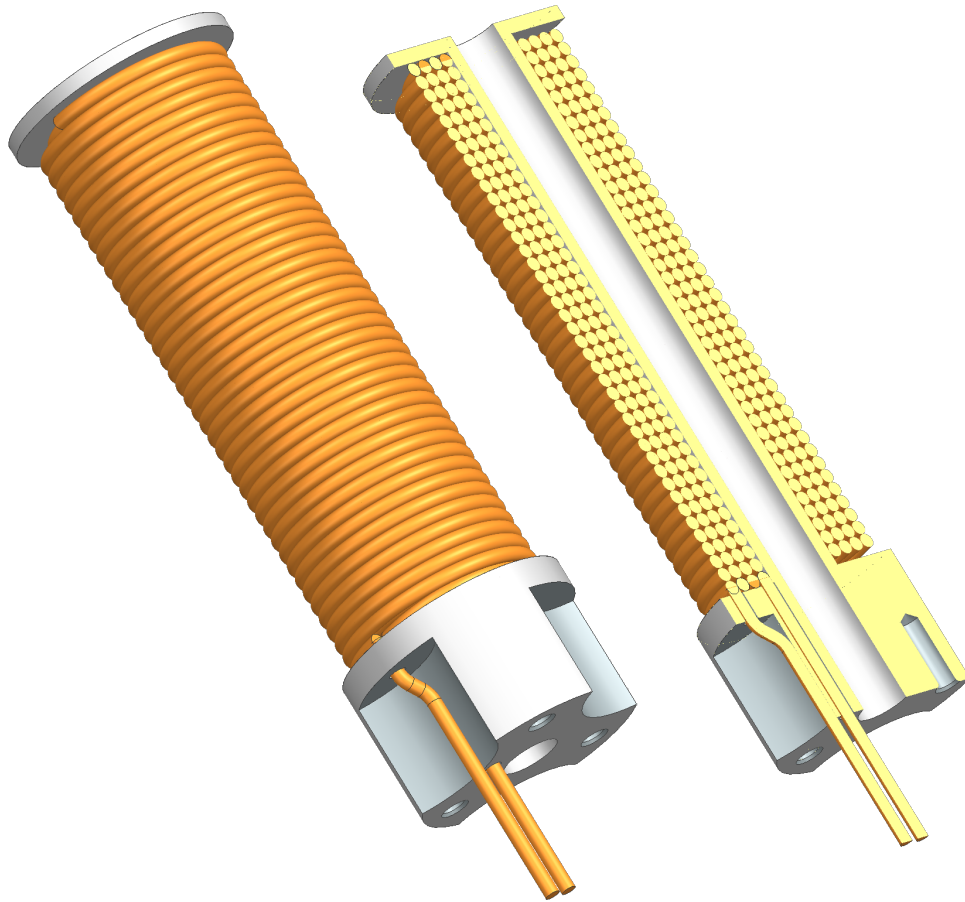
Coil with 4 layers of 1 mm Copper wire in 41 mm winding space, resulting in 160 turns on its Aluminium coil case with cable feed through and mounting holes to the bottom plate
